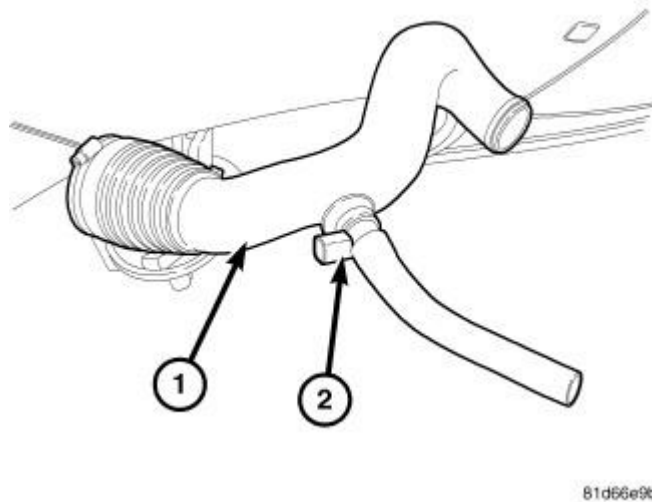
Turbocharger Air Inlet Tube & Crankcase Vent Hose Heater Electrical Connector
